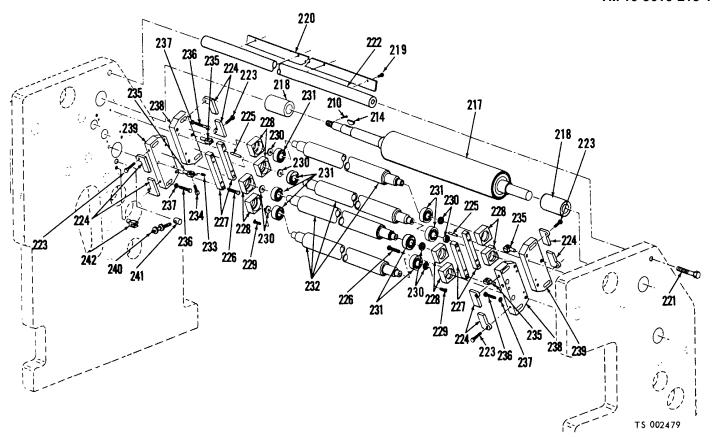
Ink motion assembly (Sheet 7 of 8).
